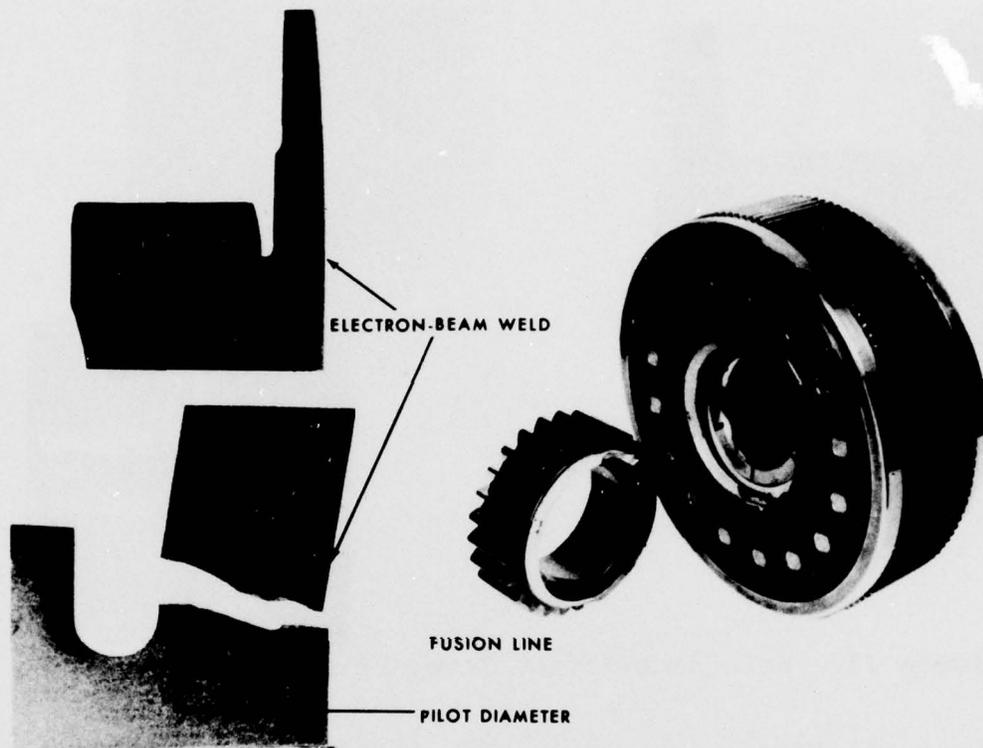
Incomplete Weld Fusion, Second-Row Pinion.
